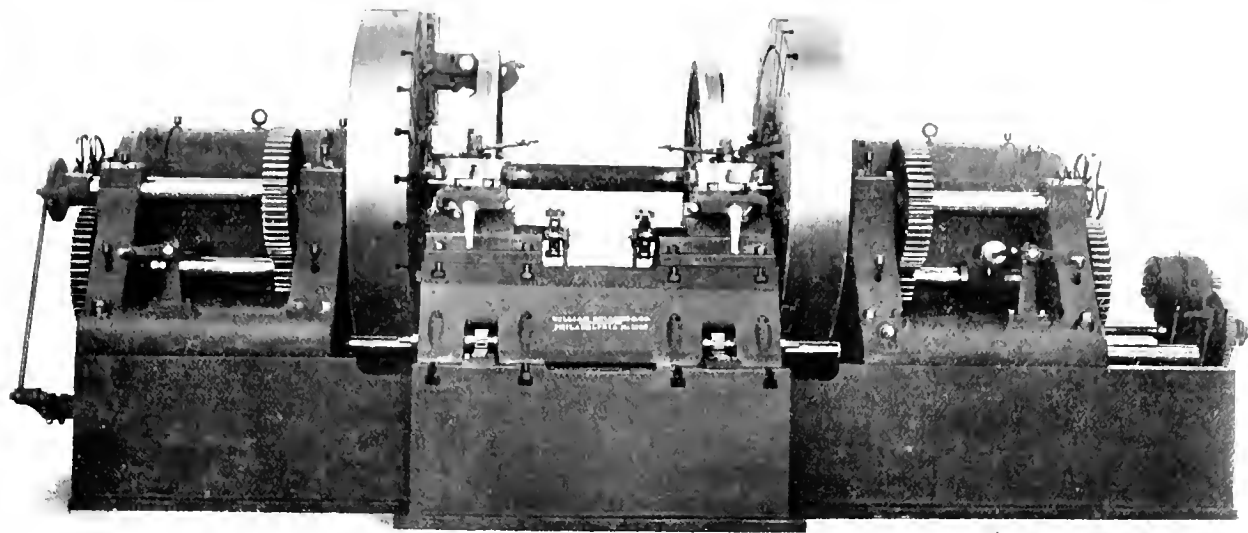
The Sellers High-power Driving-wheel Lathe.
